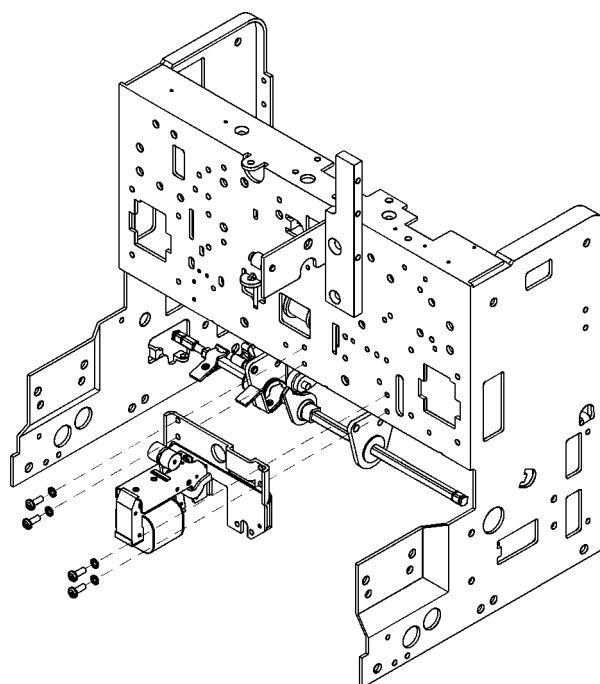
Mounting the Shunt Trip onto the breaker's bottom frame.
